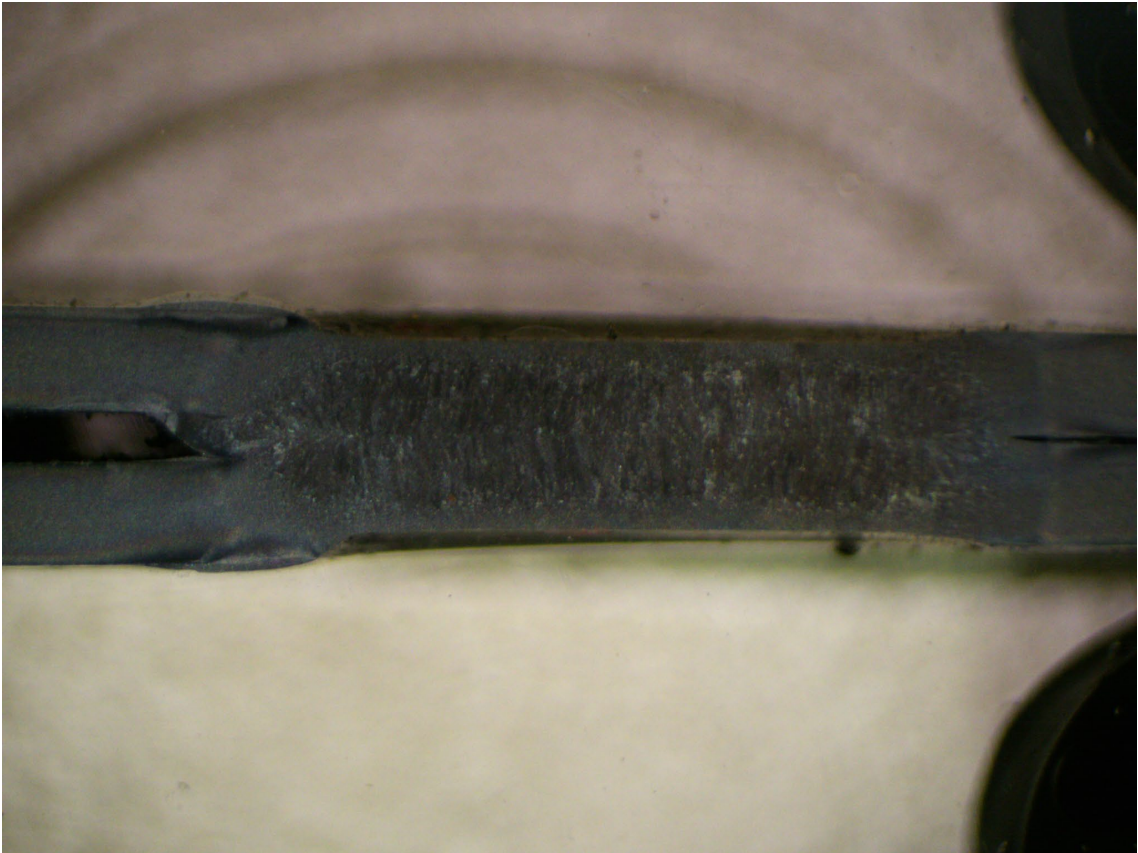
Expulsion in a spot weld sample generated using 9.5 kA welding current
